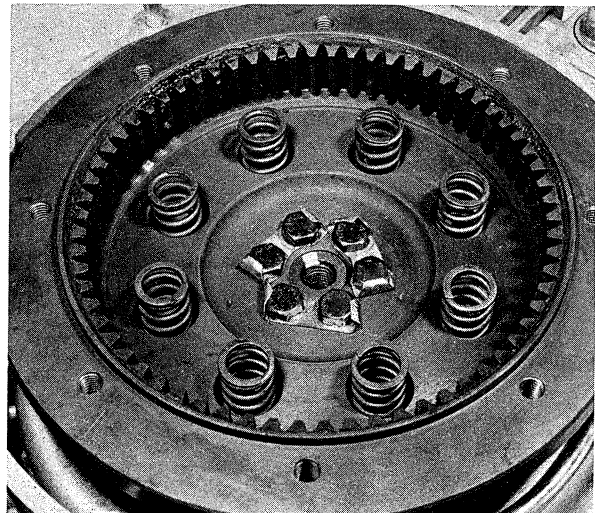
Clutch assembly - component parts - All 5-speed models
